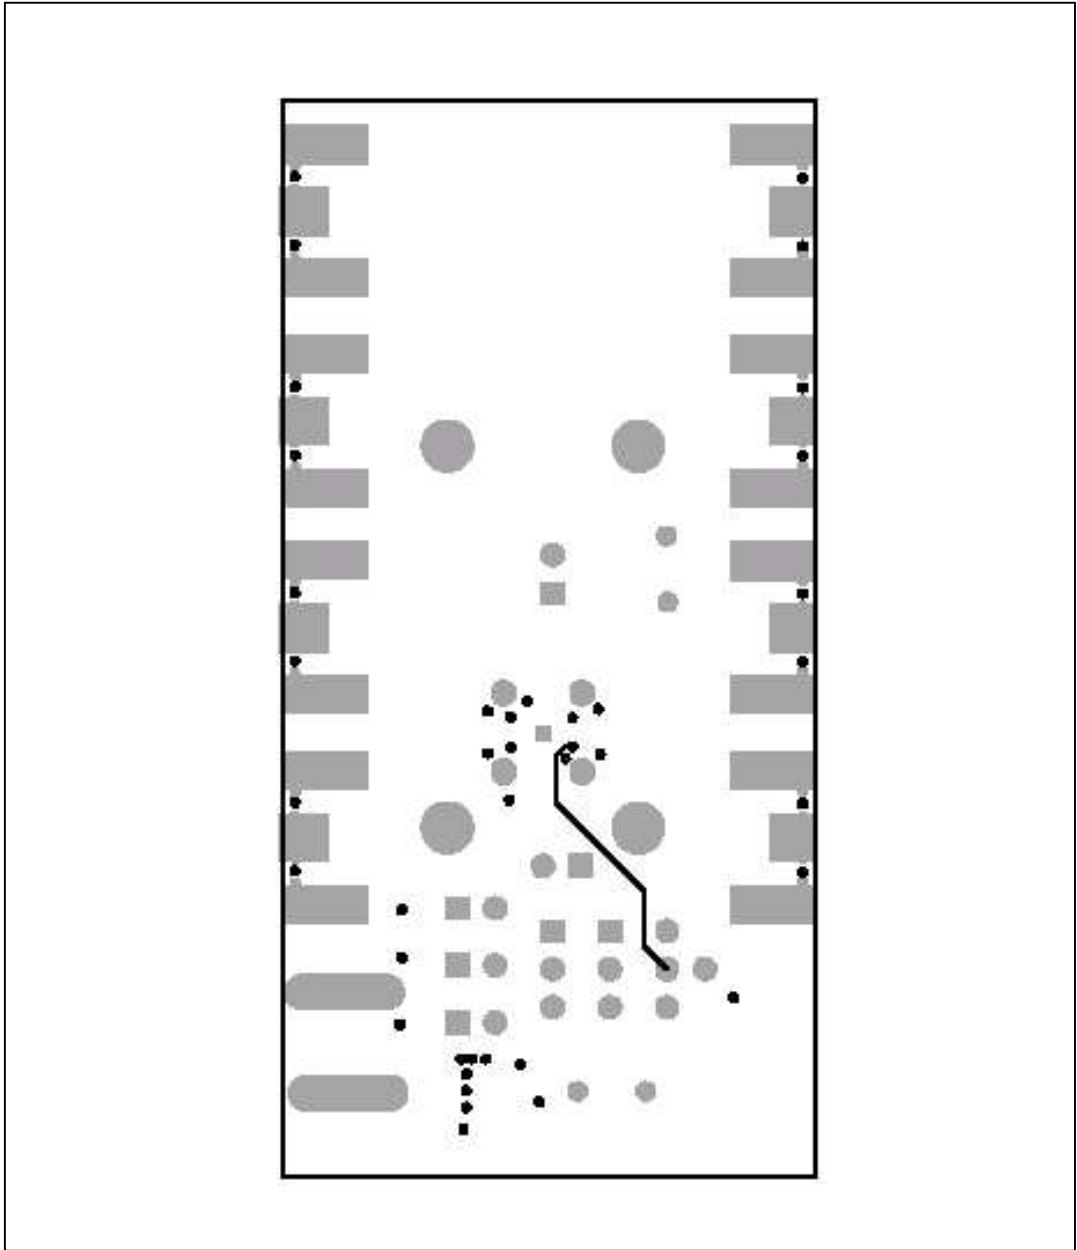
MAX3746 EV Kit PC Board Layout – Solder Side (2X)
